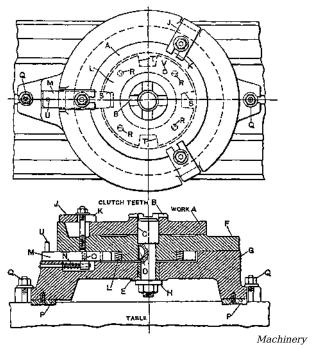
Indexing Fixture used for Milling Teeth in Clutch Gear
